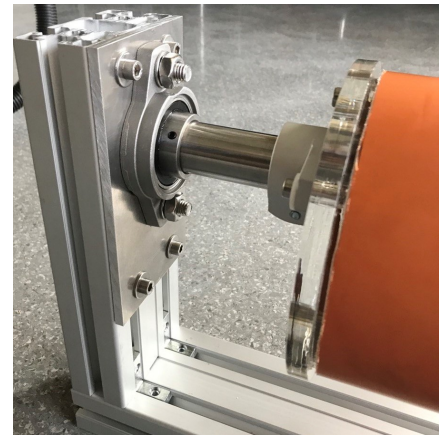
Image of the middle Plexiglas sockets mounted on the shaft.
